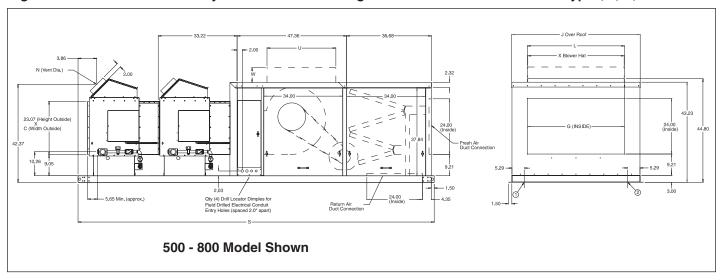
DCG Indoor Gravity Vented Cooling Package Unit Dimensions with Blower Type I, J, K, or L
